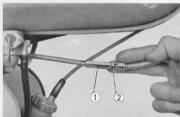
, 168 (1) Clutch cable adjuster (2) Lock nu
